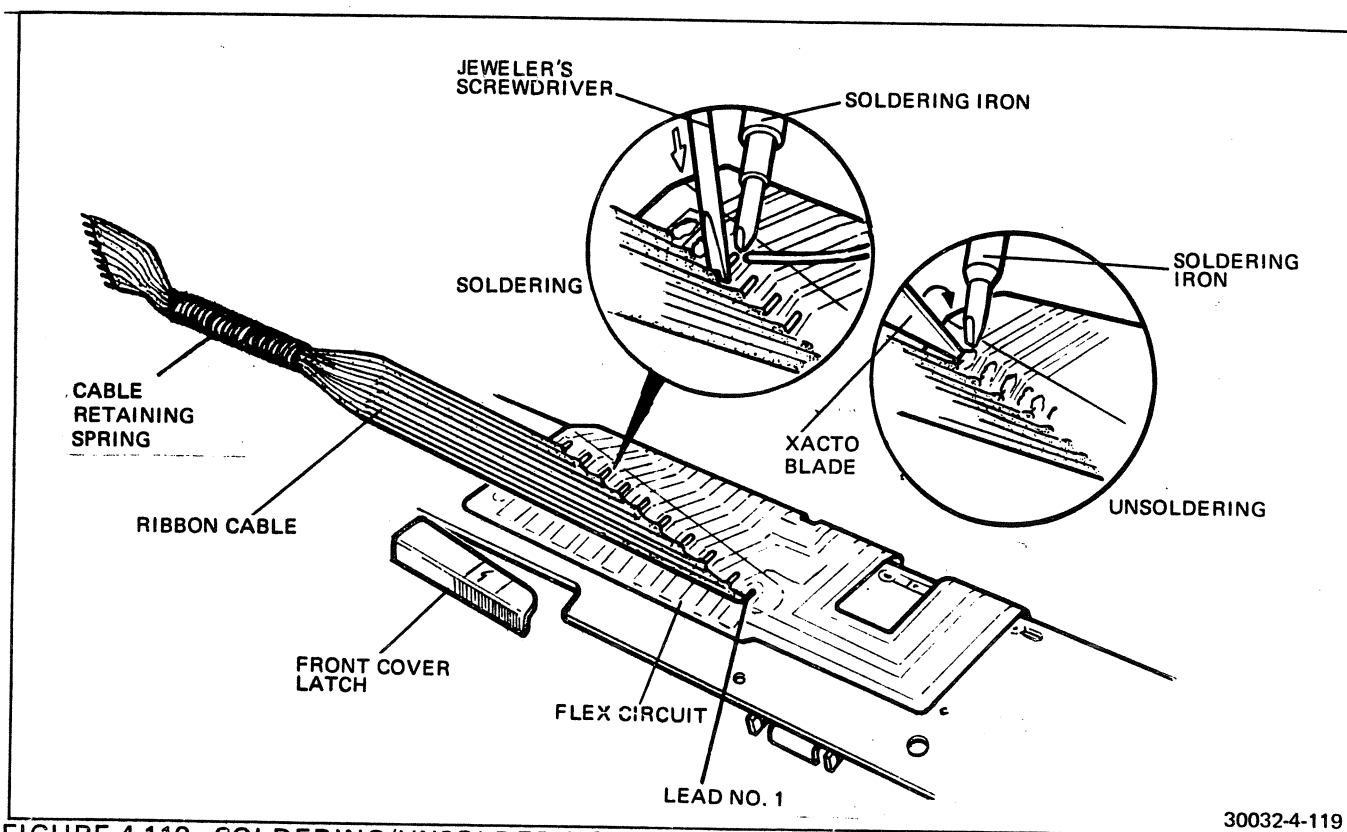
SOLDERING/UNSOLDERING RIBBON CABLE
